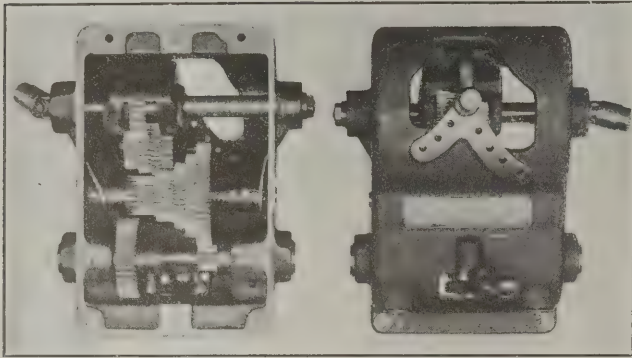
Feed Mechanism of LeBlond Milling Machine.
